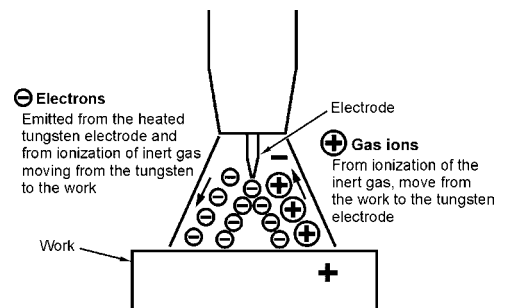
Schematic of gas tungsten arc welding, direct current electrode negative
